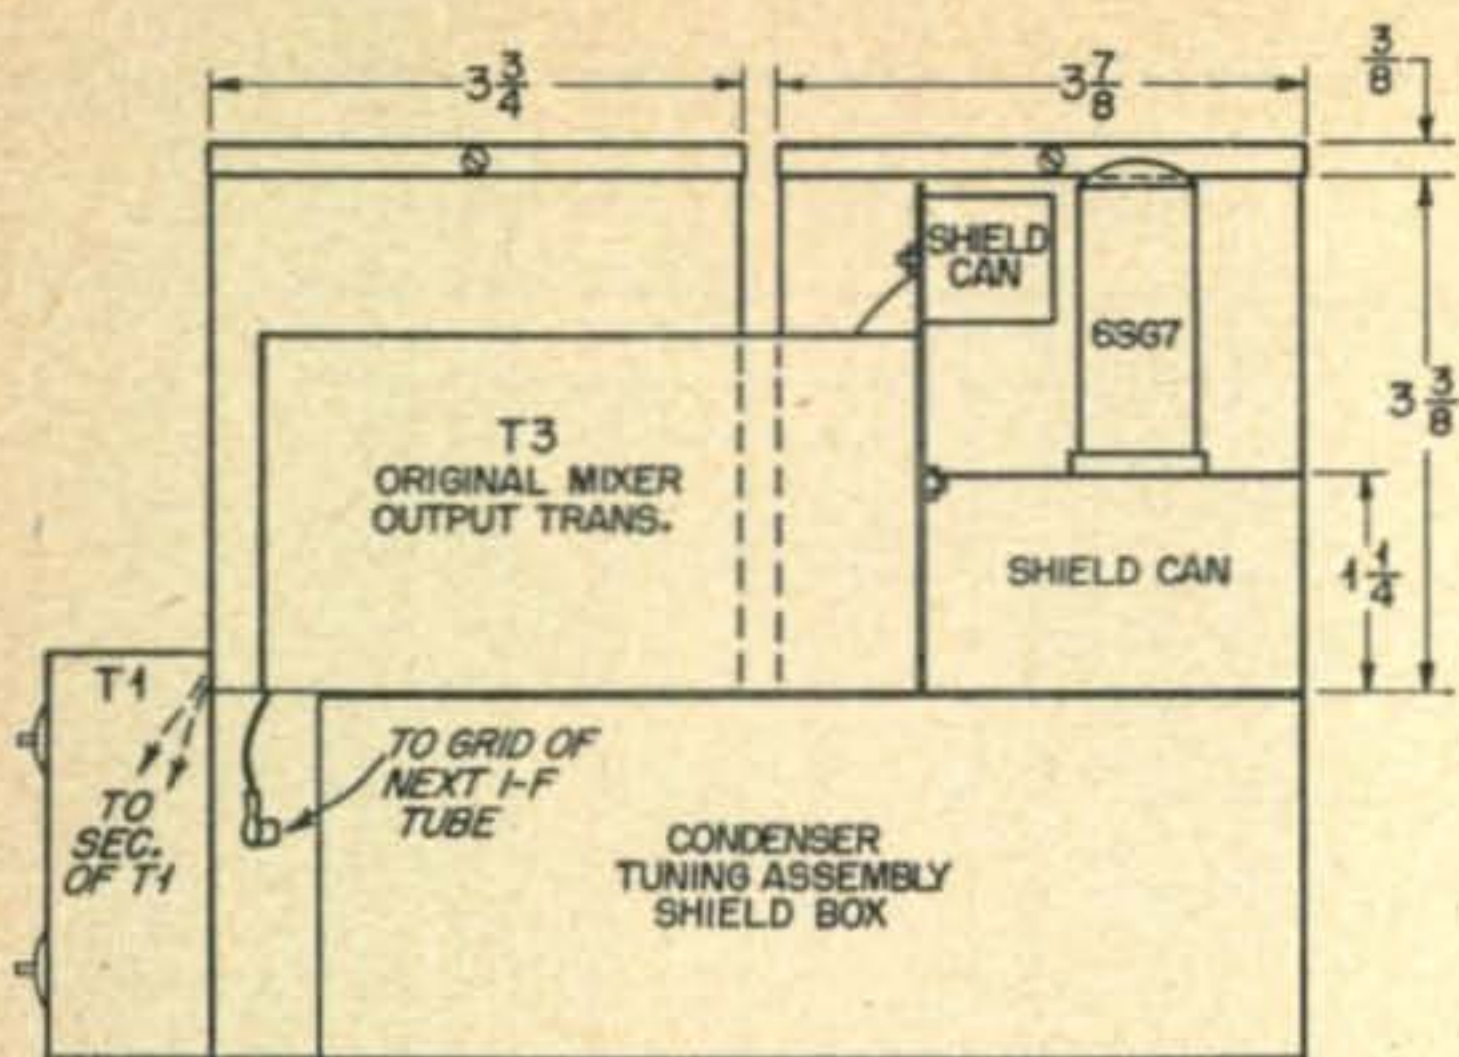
Front view outline of adapter mounting in HQ-120X.
